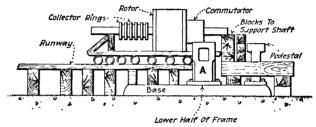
Method of rolling a rotor into position in the bearings without cutting the skids.
